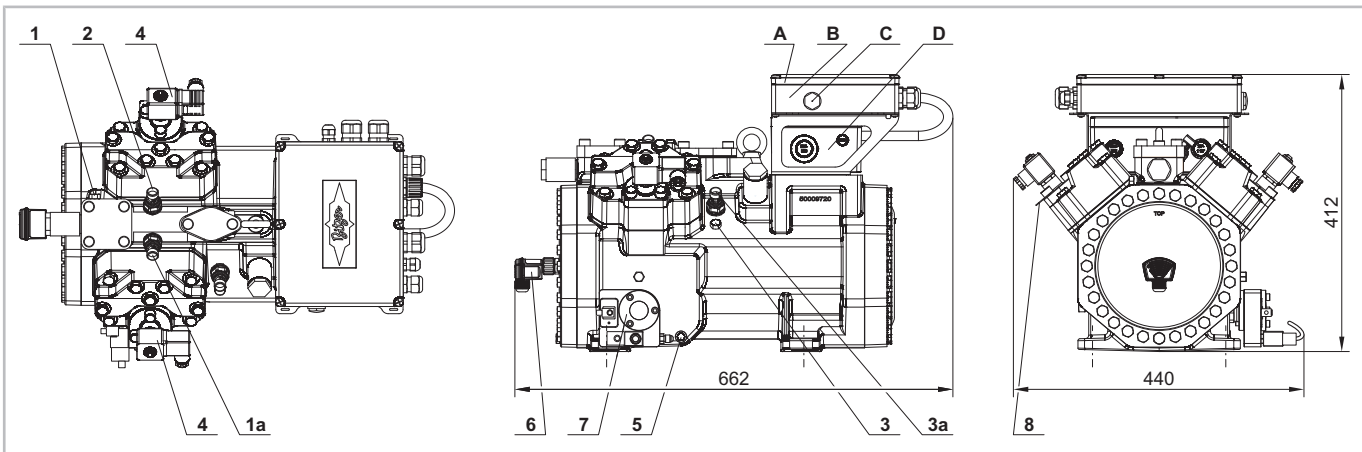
4PTE-6K/6Z .. 4KTE-10K/10Z and 4PTEU-6LK/6LZ .. 4KTEU-10LK/10LZ with all options offered by CM-RC-01. Illustration without cables.
